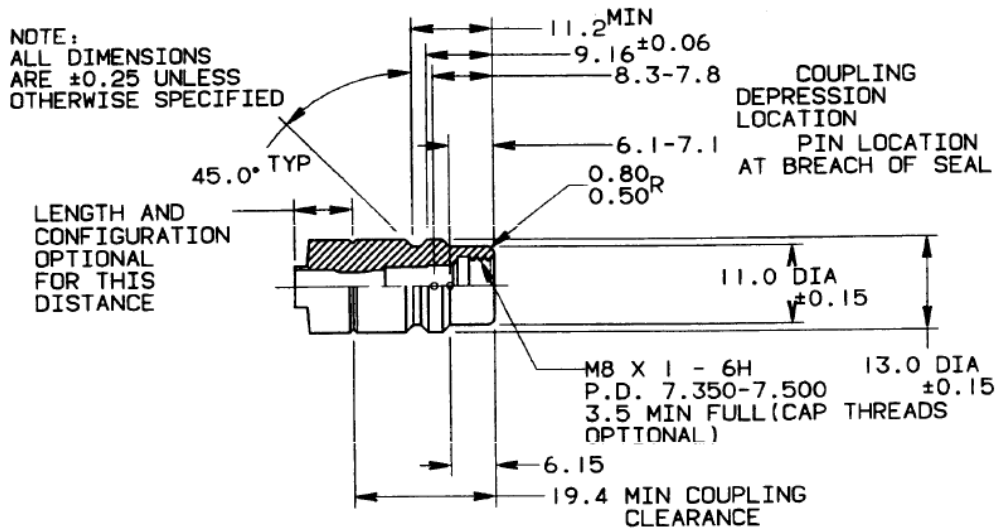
B - R-134a LOW SIDE SERVICE FITTING (DIMENSIONS ARE METRIC)
